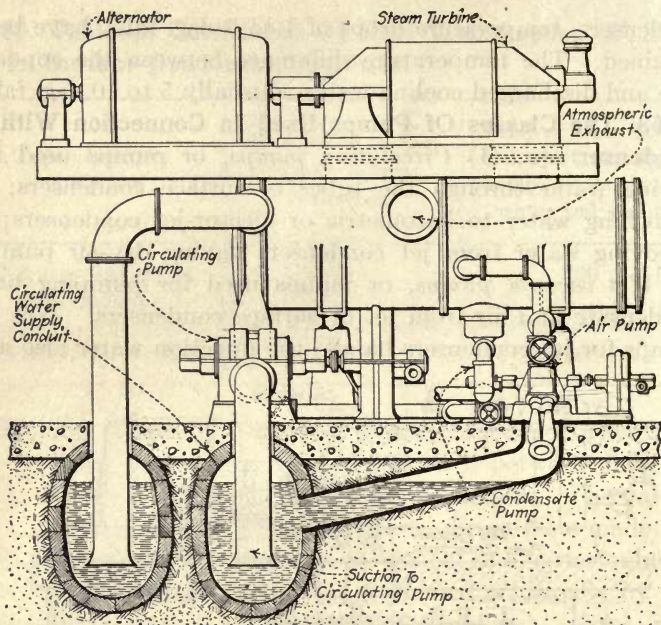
Turbine With Westinghouse-Leblanc Surface Condenser. (The equipment shown has been superseded by more modern designs.)
